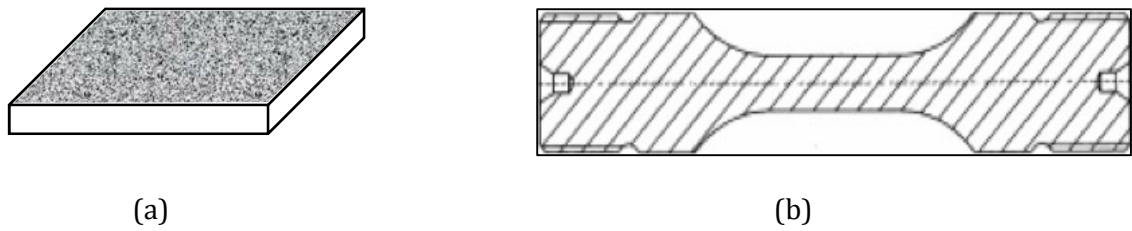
Fine grain RR1000 test specimens (a) Flat plate specimen, (b) Round bar fatigue specimen
